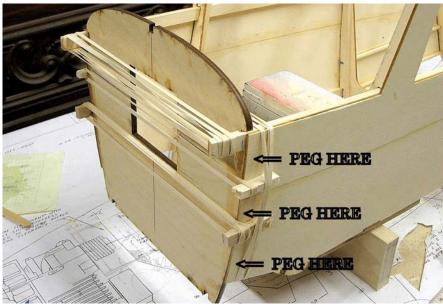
Typical peg locations on a fuselage-to-firewall joint.
